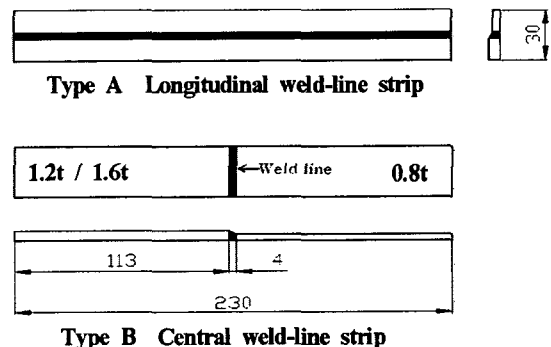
Tailor-welded strips for U-bending test (Unit: mm)
